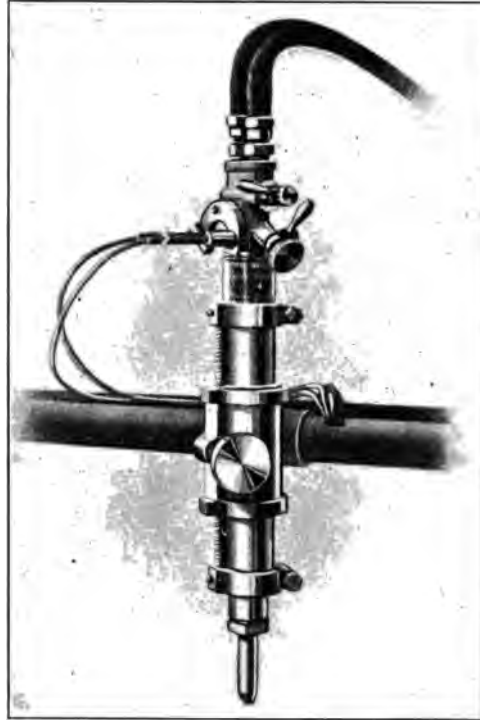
MACHINE CUTTING TORCH WITH MOTOR CONTROL SWITCH, AND RACK-AND-PINION VERTICAL ADJUSTMENT.
